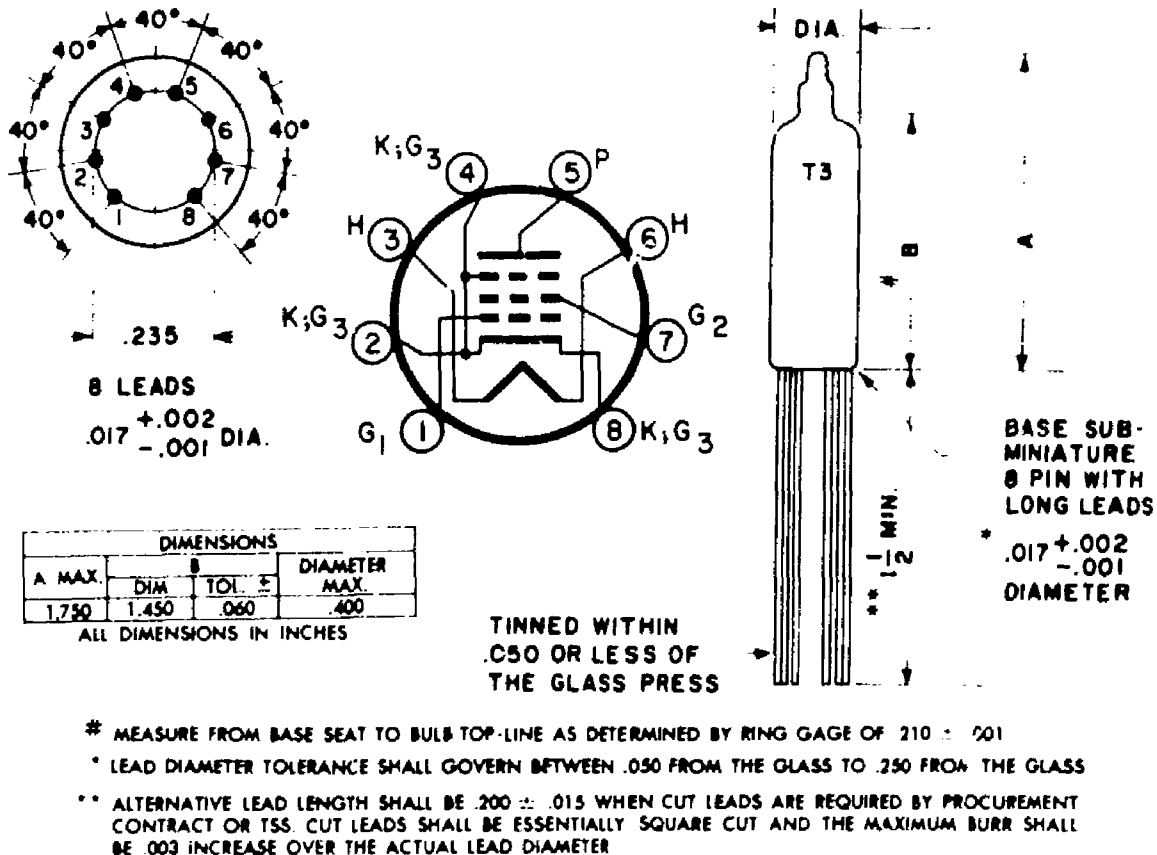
Outline Drawing and Base Diagram of Tube Type JAN-5639
